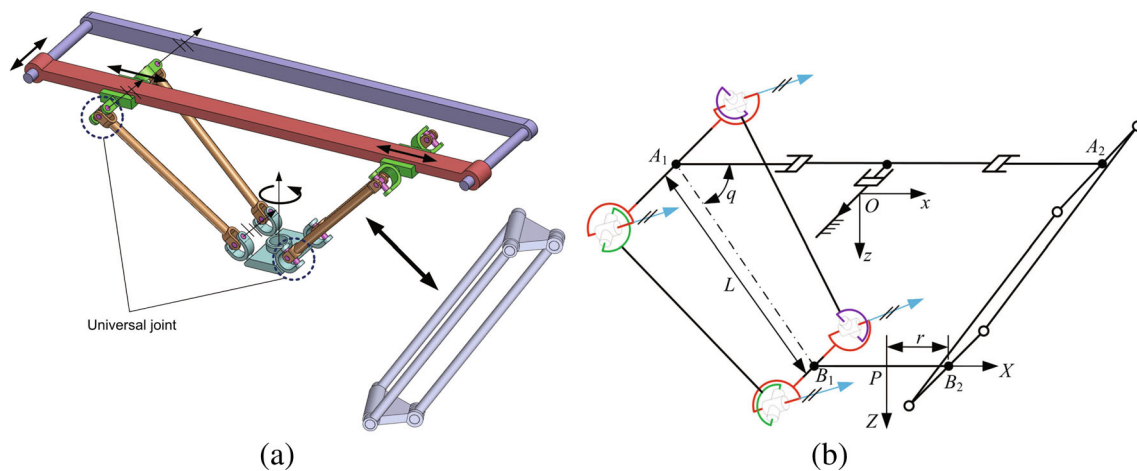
The Biglide parallel mechanism. a Simplified CAD model. b Kinematic structure
